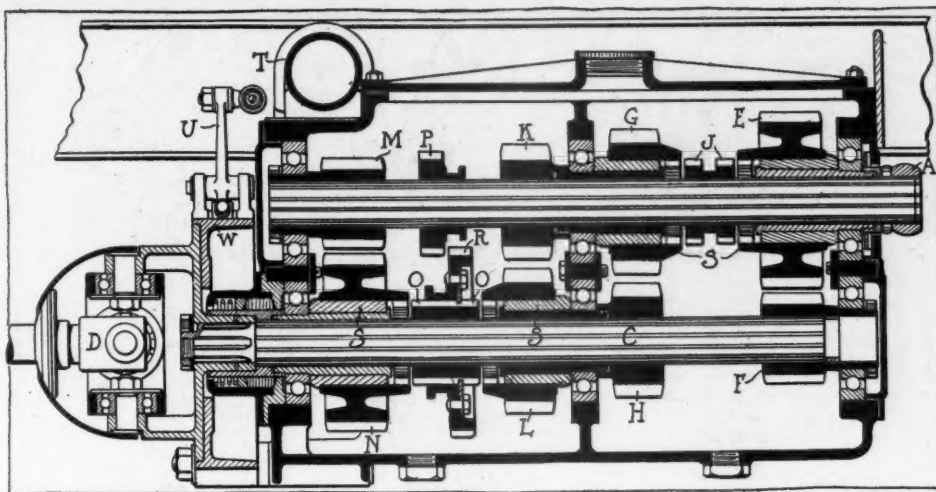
THE MAUDSLAY CHAIN-DRIVE GEARBOX FOR NEXT YEAR
